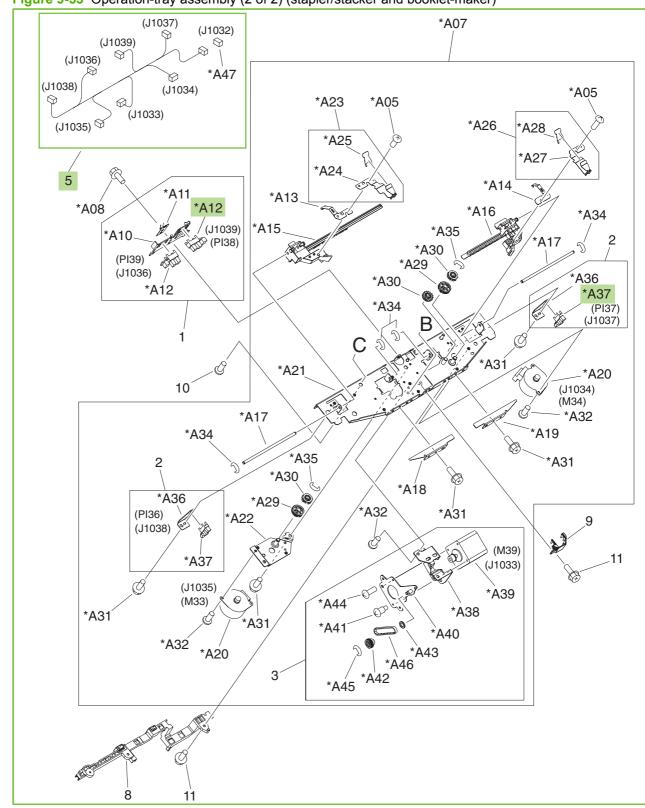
Operation-tray assembly (2 of 2) (stapler/stacker and booklet-maker)
